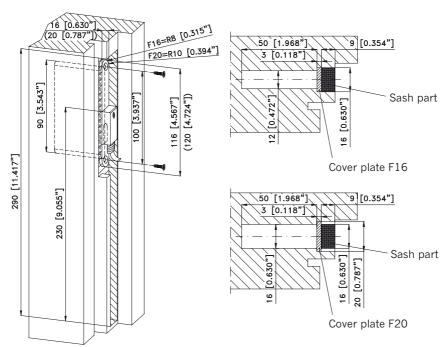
Routing dimensions for cable transition KÜ-T-STV
